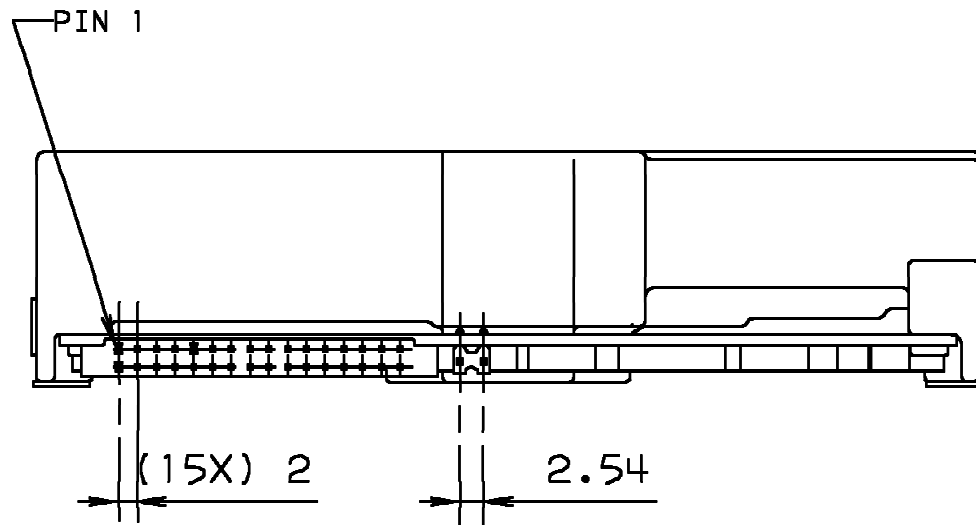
Electrical connectors (rear view) -- 50 pin SCSI
